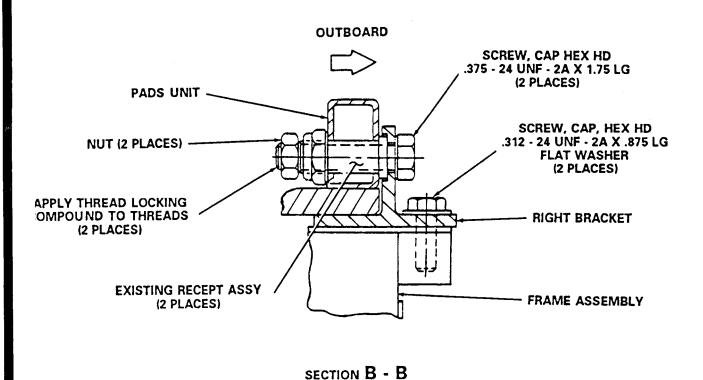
PADS Primary Pallet Installation Details (Sheet 2 of 2)
